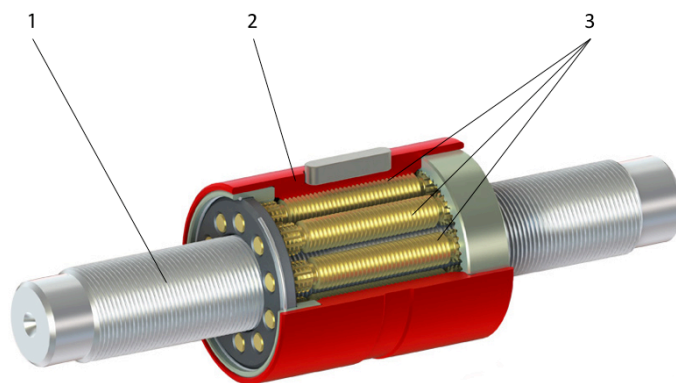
Schematic diagram of a planetary roller screw: (1) screw shaft, (2) nut and (3) rollers (adapted from [97]).
